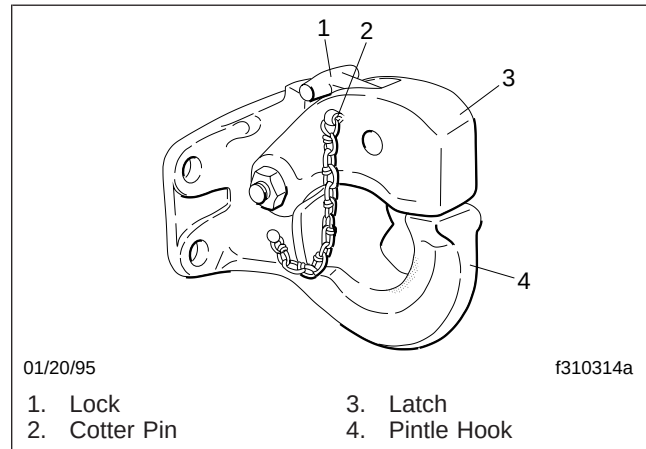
, Holland PH-T-60-AL Trailer Coupling
